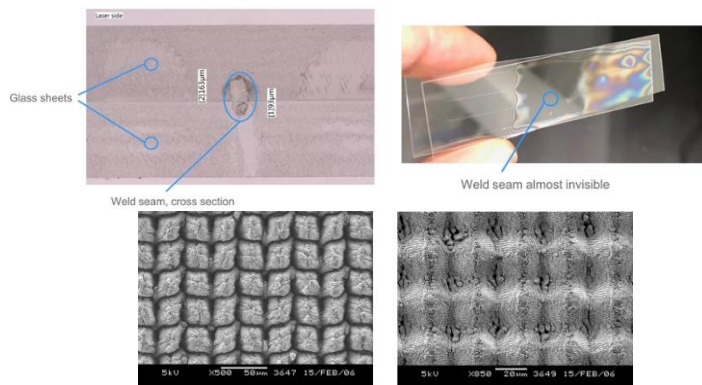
Emerging femtosecond laser micro-processing applications. Top: Glass Welding using 40 W, 1 MHz, 300 fs 1035 nm laser. A plasma is generated at the interface between the glass sheets (Left). Two-dimensional scanning allows generation of invisible weld seams (right). Glass-to-metal welding can also be realized. Bottom: micro-structuring of steel using a fs IR laser to generate a hydrophobic surface (to repel water). This application will require line beam focusing and average power levels up to several 100 W.
